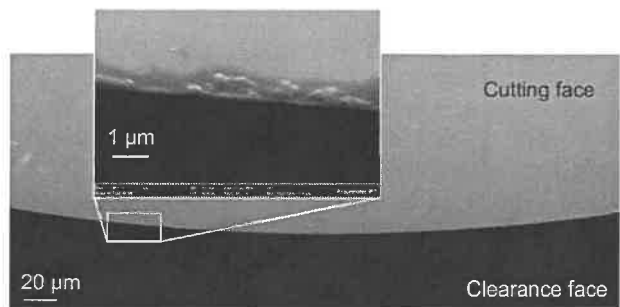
Diamond tool that was used for the pre and finish machining of convex steel asphere applying ultrasonic vibration
